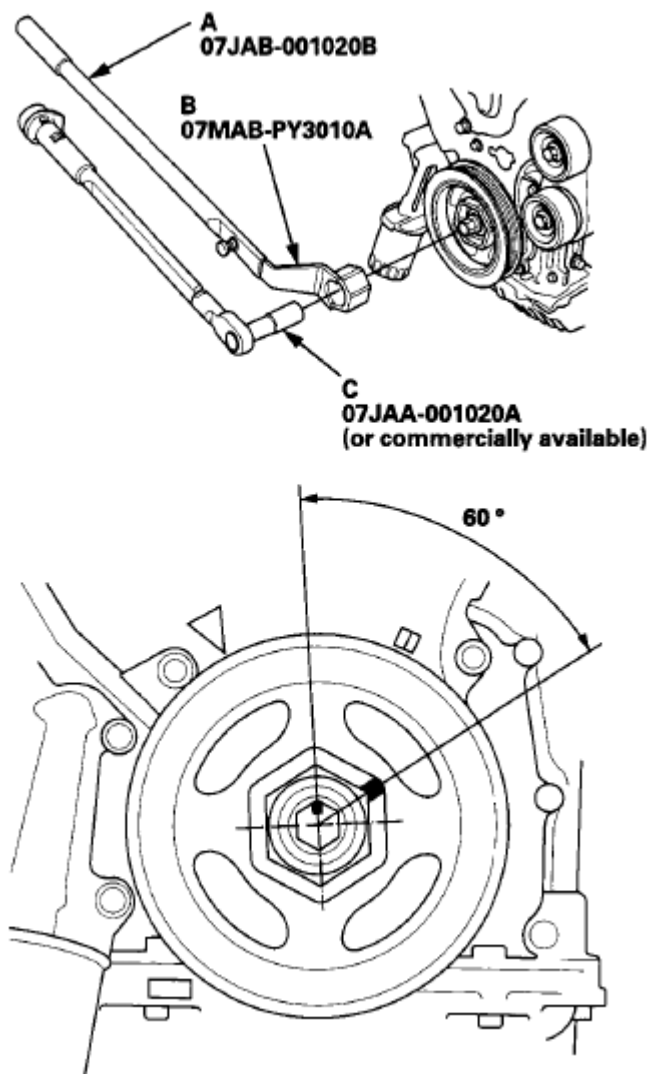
Holding Pulley With Holder Handle And Holder Attachment
